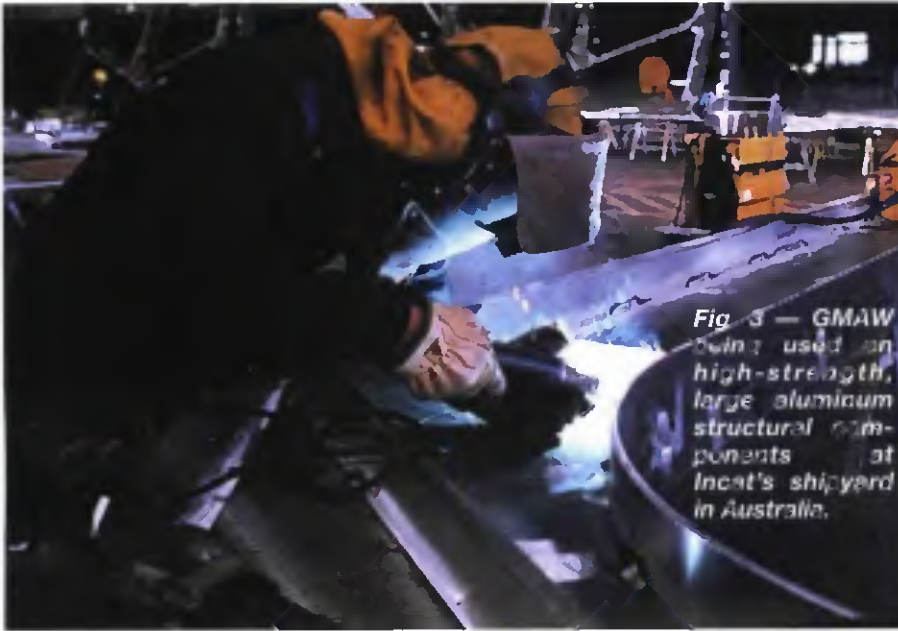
GMAW welding used on high-strength, large aluminum structural components at Incat's shipyard in Australia.
